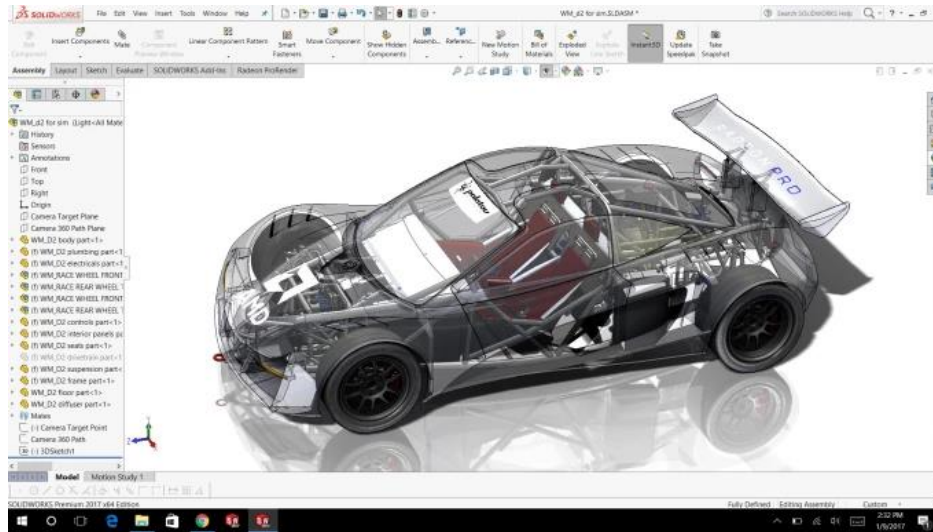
Full Assembly of a SOLIDWORKS Design
